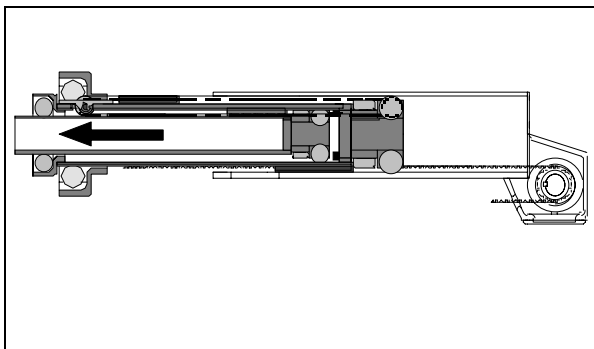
Remove toothed belt sealing piece and mechanical limit stop (Pos. No. for HTR80)
